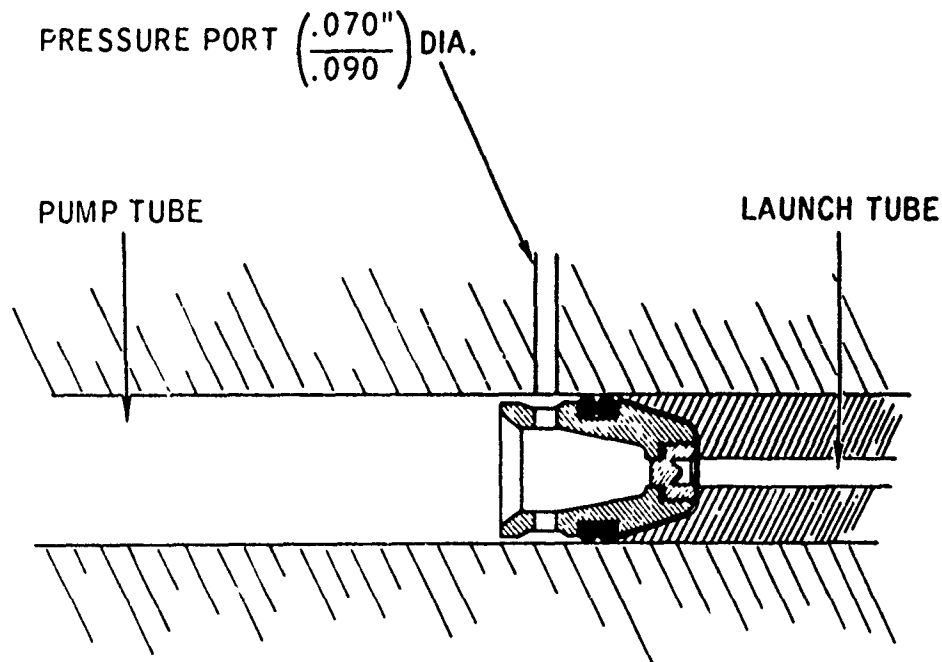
Cross Sectional View of Carrier Seated in Firing Position
